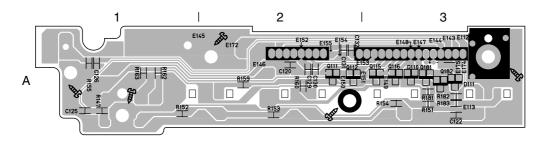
EU03B Front (L) PC Board (Bottom side)
